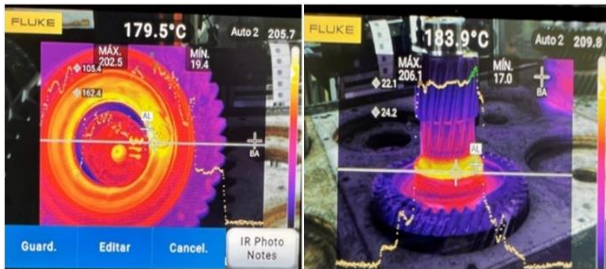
Exit temperature of the shaft and gear welding bead
